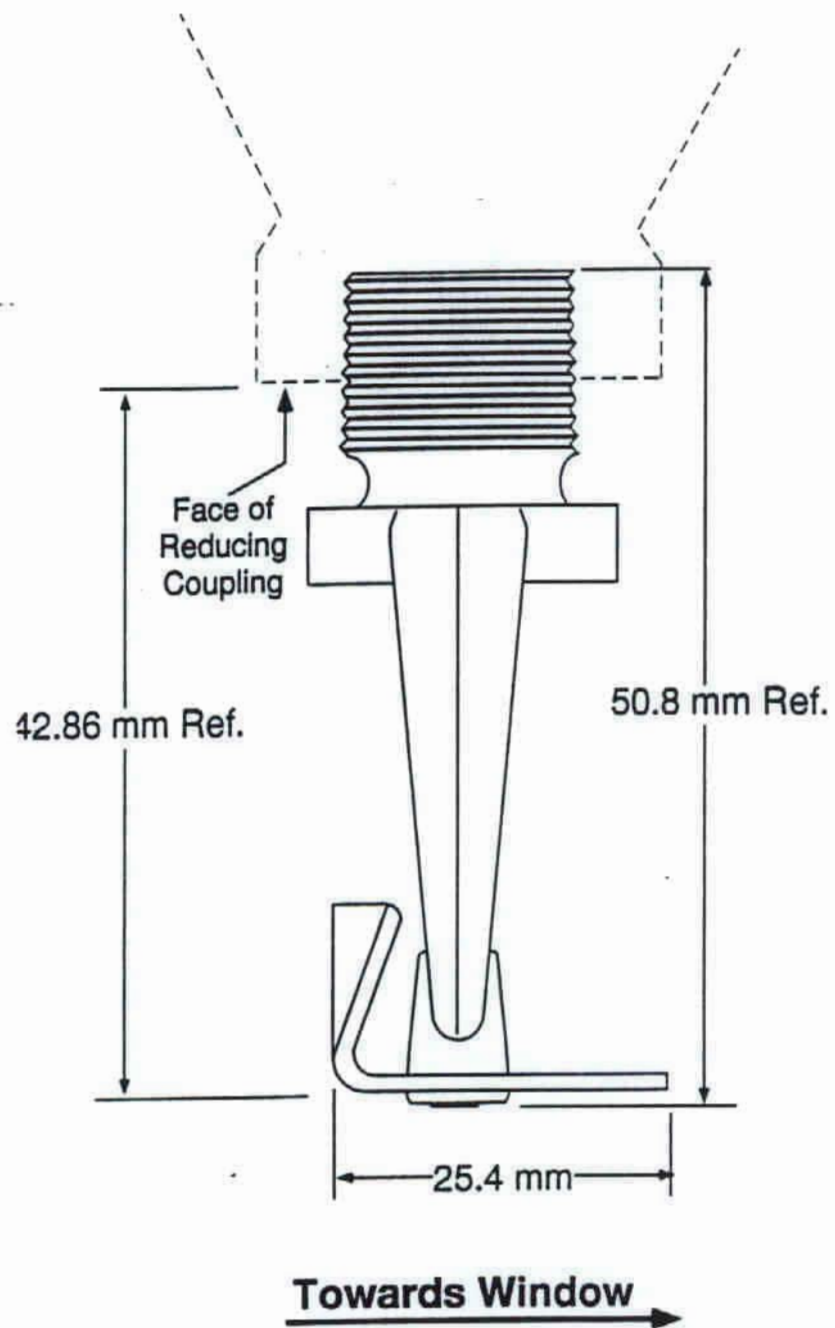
WS Pendent Vertical Sidewall Window Sprinkler
